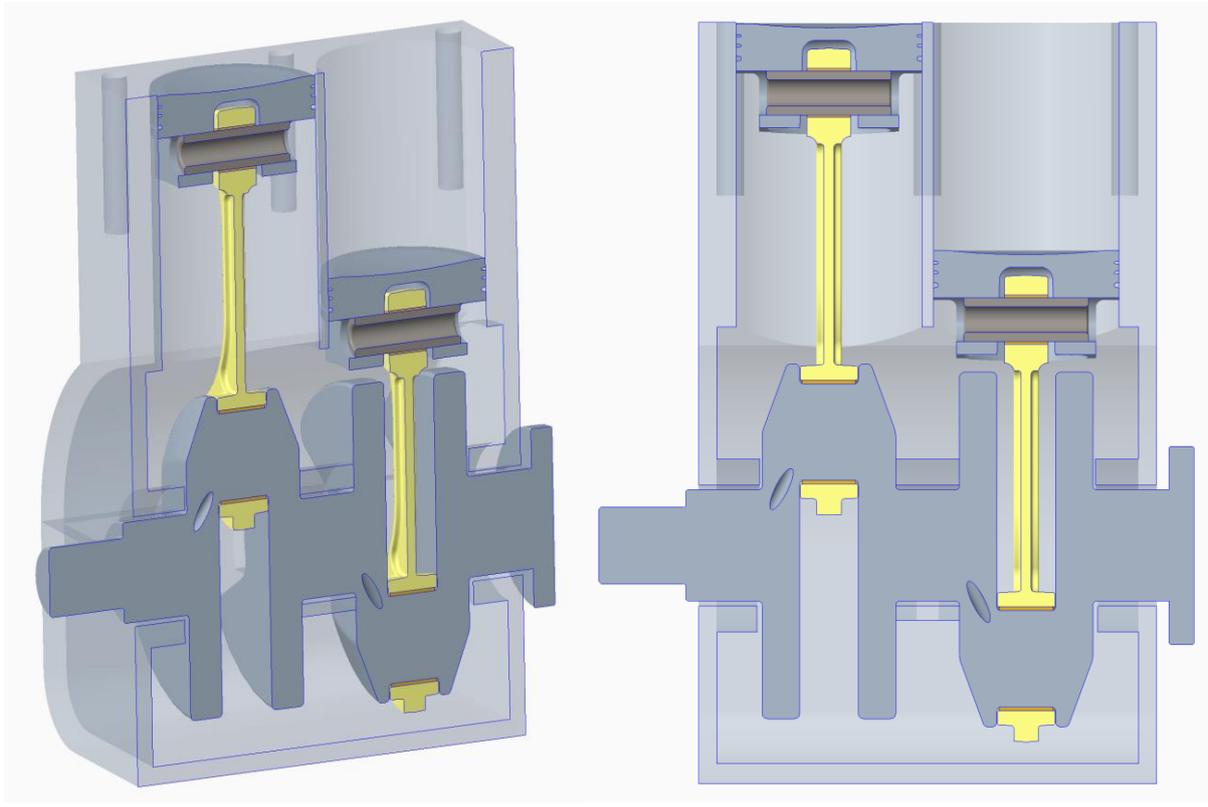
Illustration of parametric 3D CAD model of twin-cylinder engine
